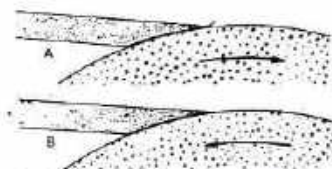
(A) GRINDER WHEEL IS RUNNING WRONG (B) GRINDER WHEEL IS RUNNING CORRECT
